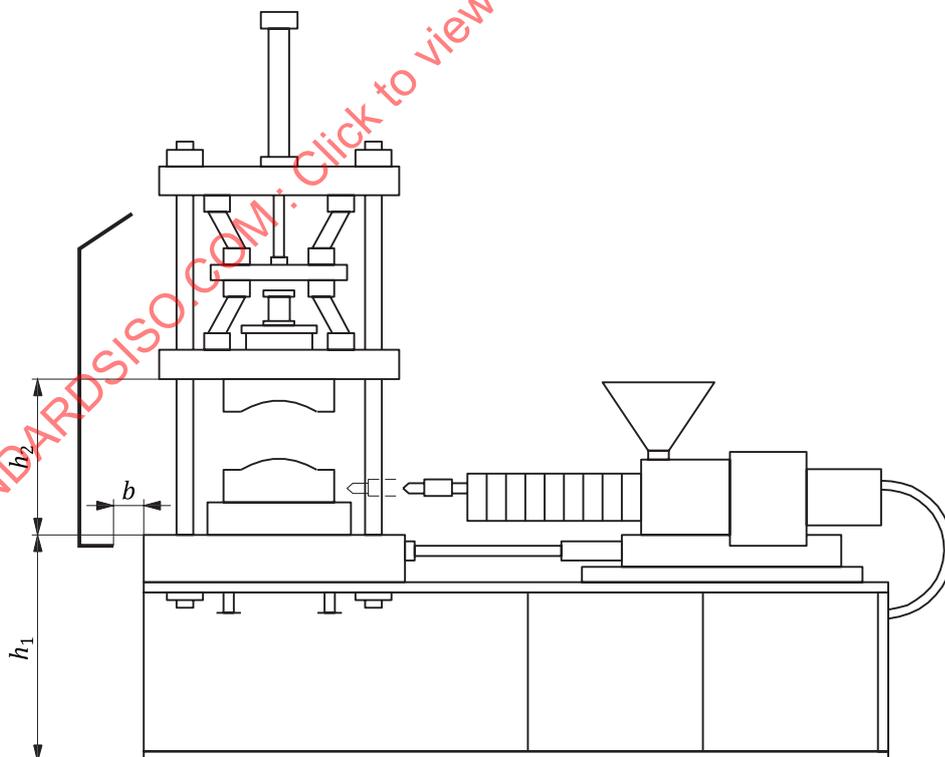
Examples of the positioning of movable guards and dimensions b , h_1 , h_2 for machines with vertical clamping unit (only the guard on the operator side is shown)
